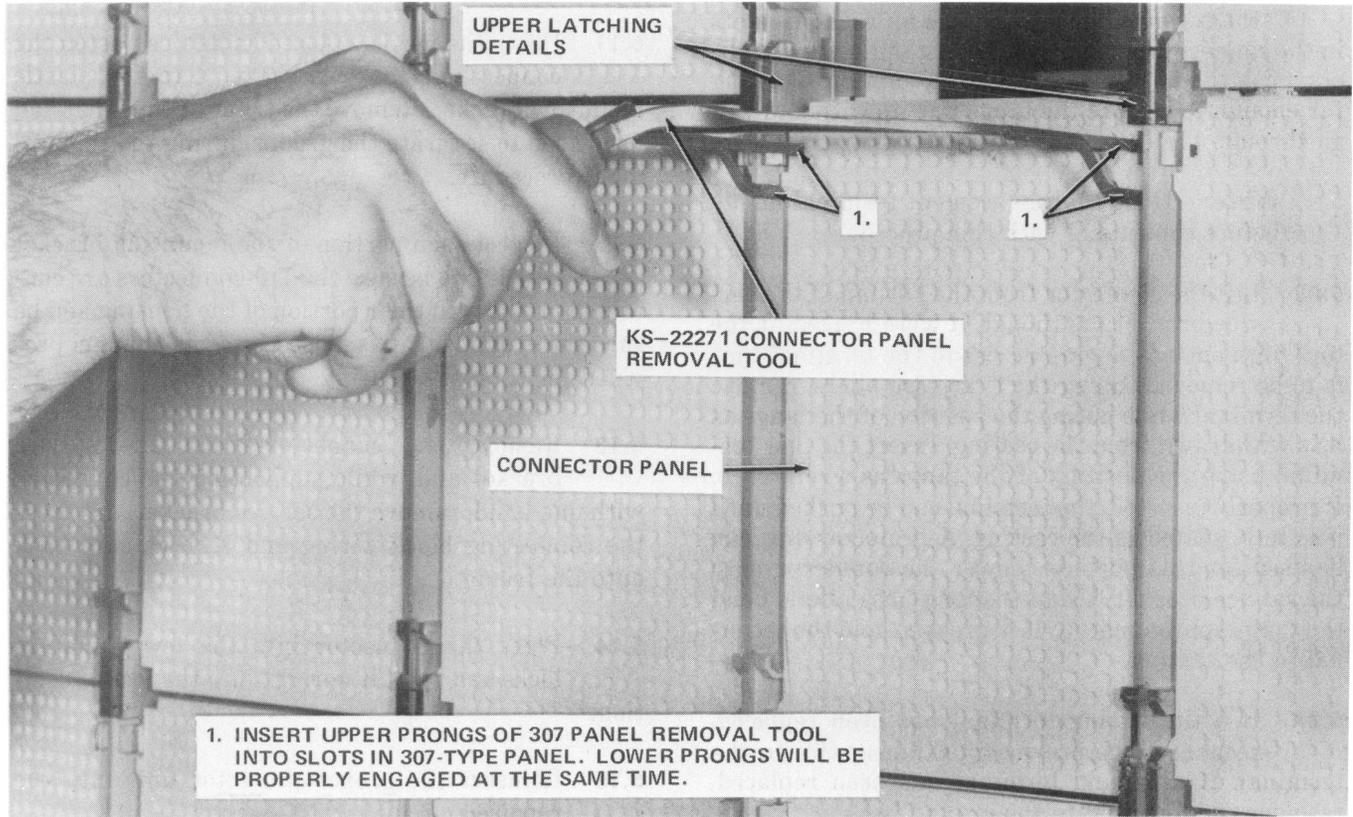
Engaging Connector Panel Removal Tool Into Panel
